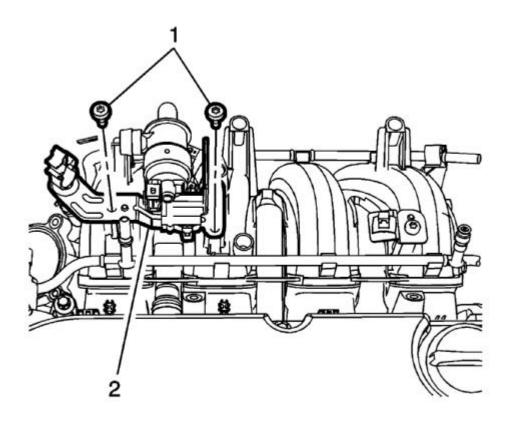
Booster Vacuum Pipe Courtesy of GENERAL MOTORS COMPANY
